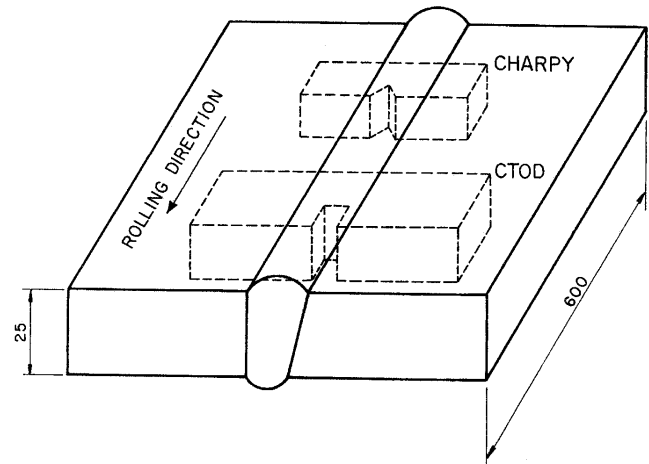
Schematic of sampling for Charpy V-notch and crack tip opening displacement test pieces for the weld metal. (All dimensions are in mm.)
